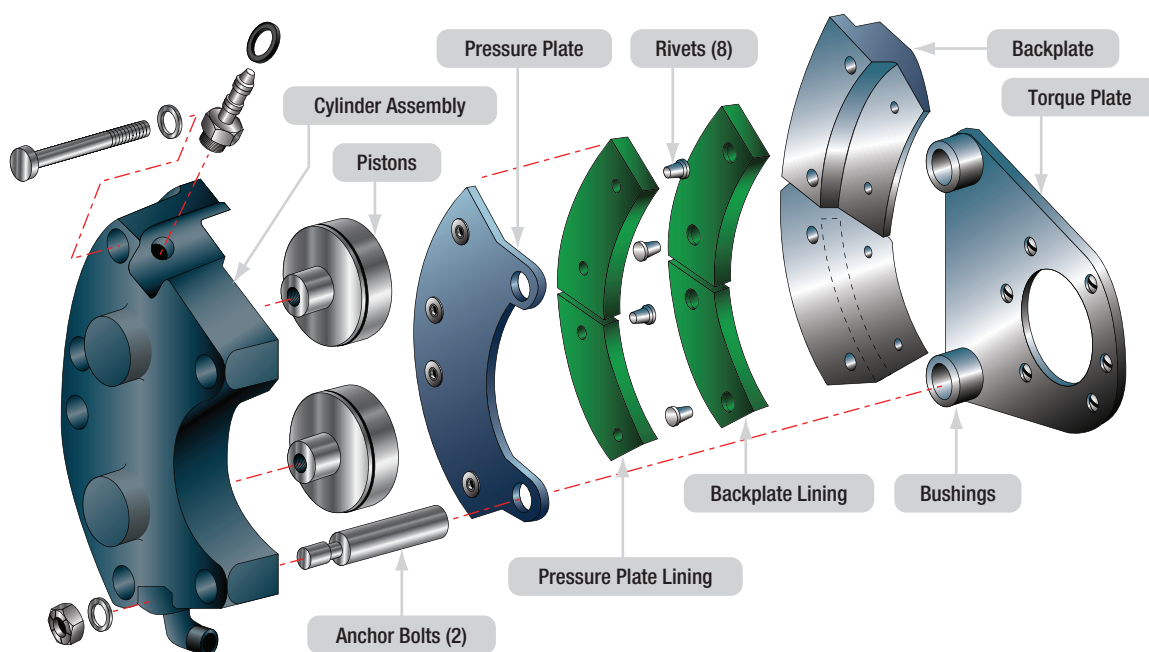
An exploded view of a dual-piston Cleveland brake assembly.
